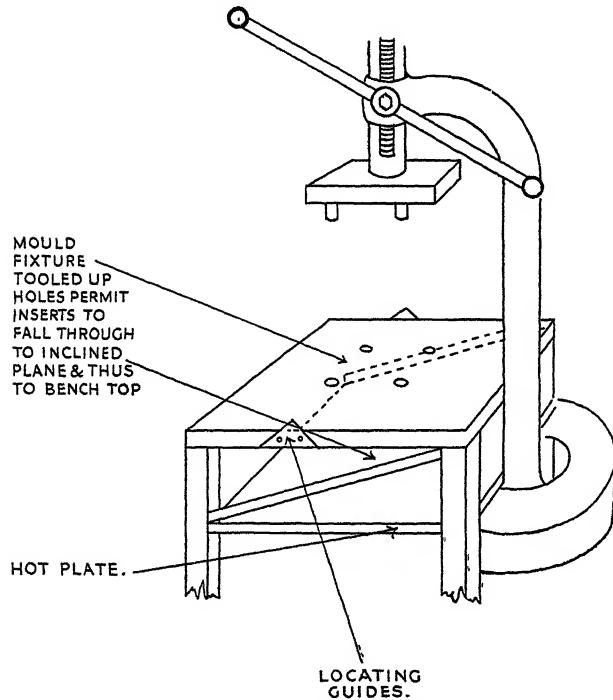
D. DETAIL OF TOOLED ARBOR PRESS
